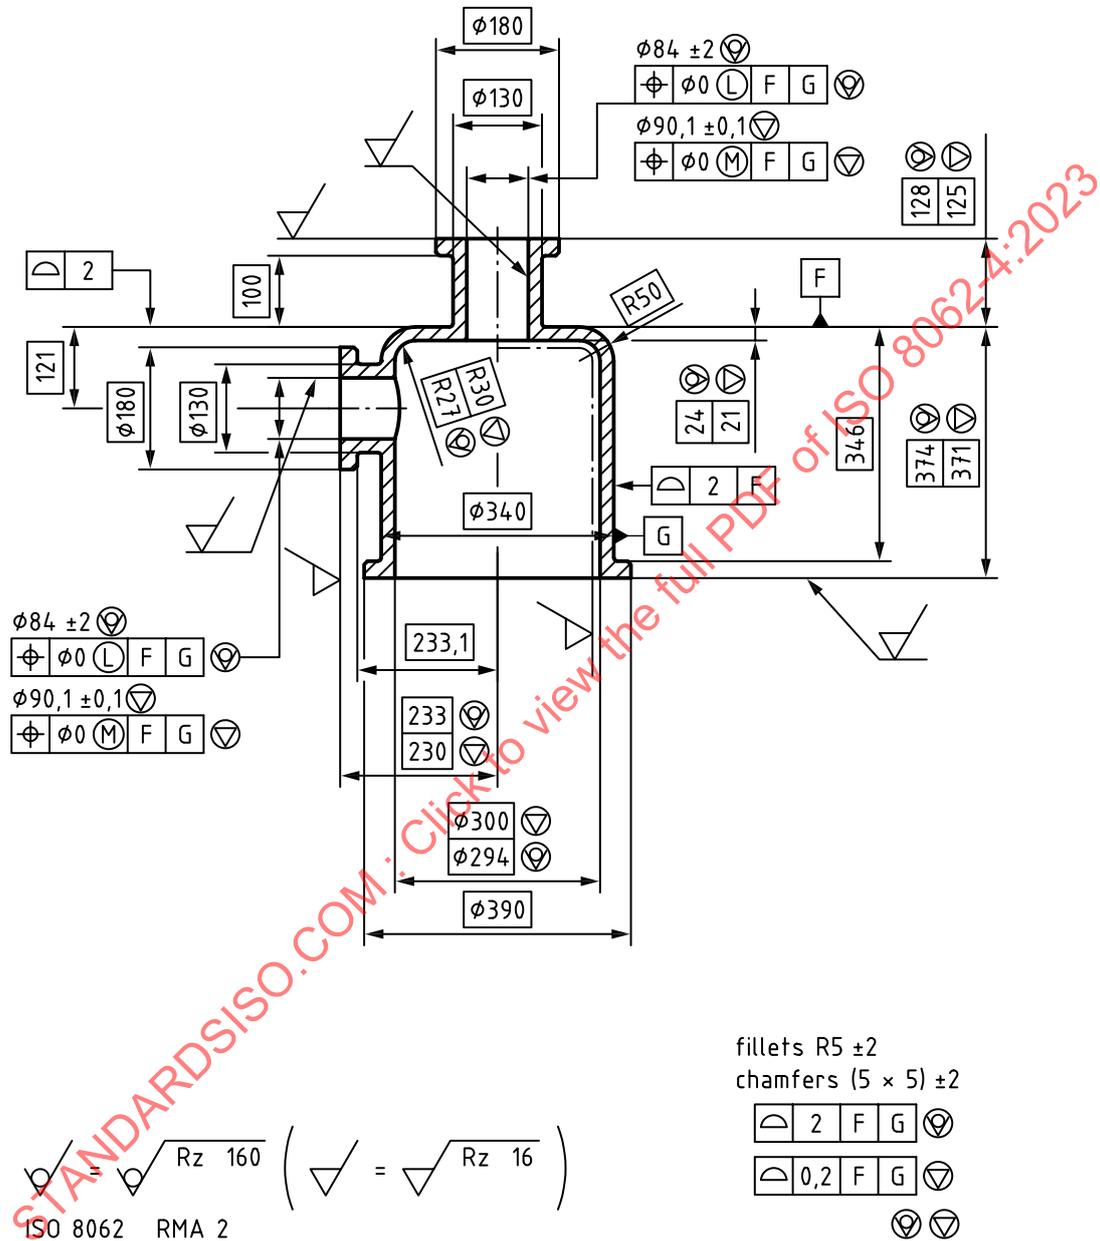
Final moulded part and final machined moulded part, multiple tolerancing method
